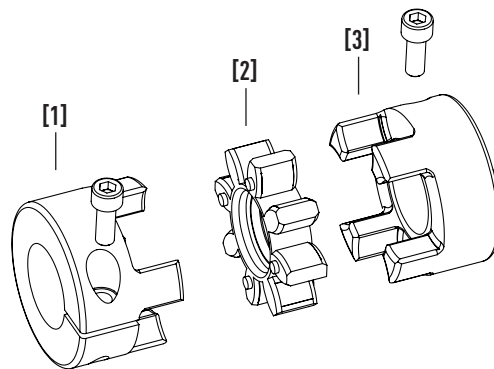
Coupling assembly variant 1: clamping hubs with one clamping screw
